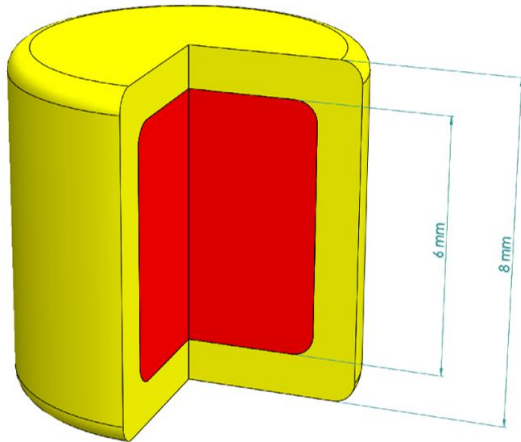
Model of prototype CAB unit, showing interior precursor layer (red) and exterior encapsulation layer (yellow). Dimensions are approximate.
